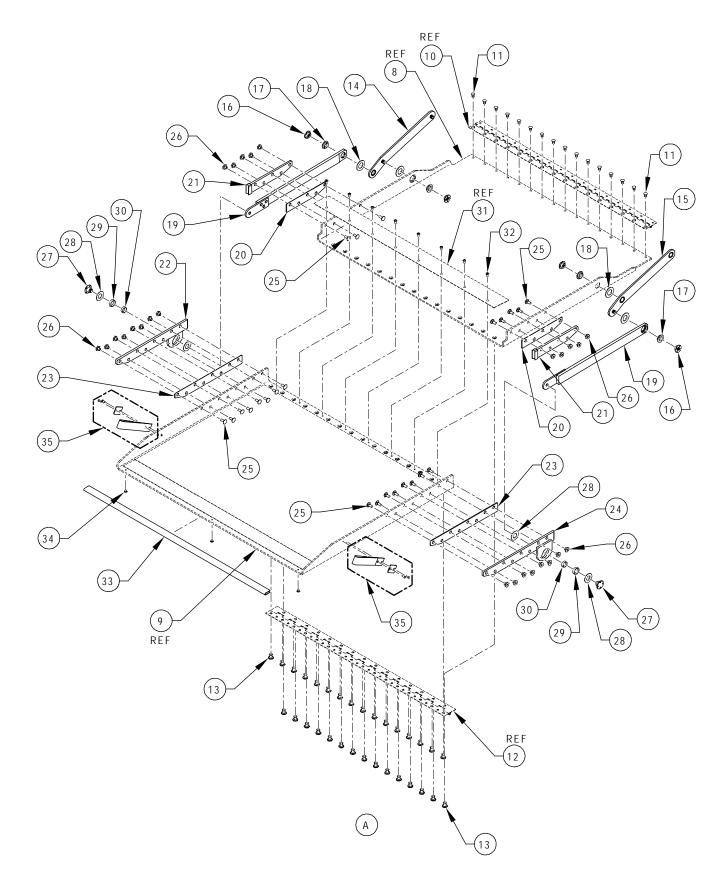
BR2C-SERIES RAMP ASSEMBLY (SHEET 2 OF 3)
